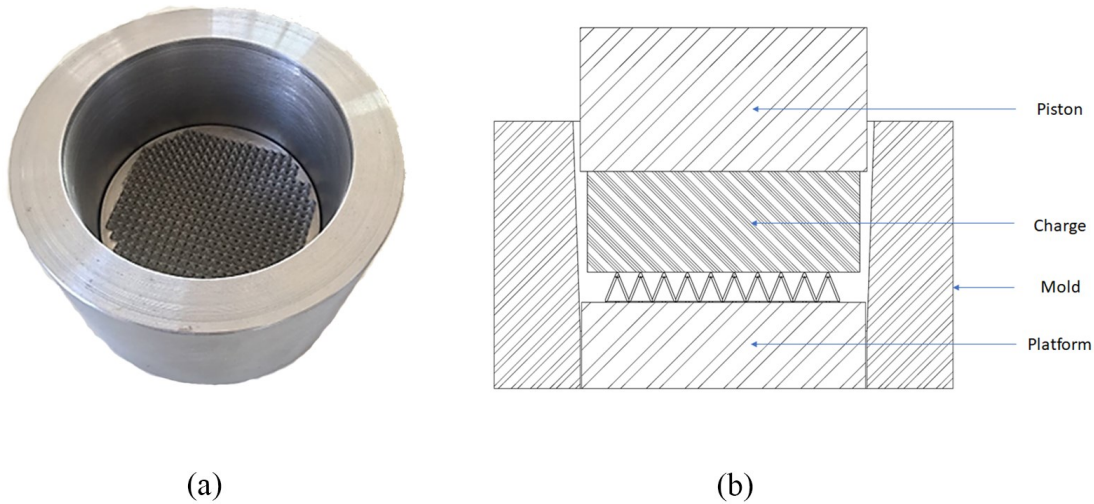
a) Platform placed at the bottom of the mold b) pressing section
